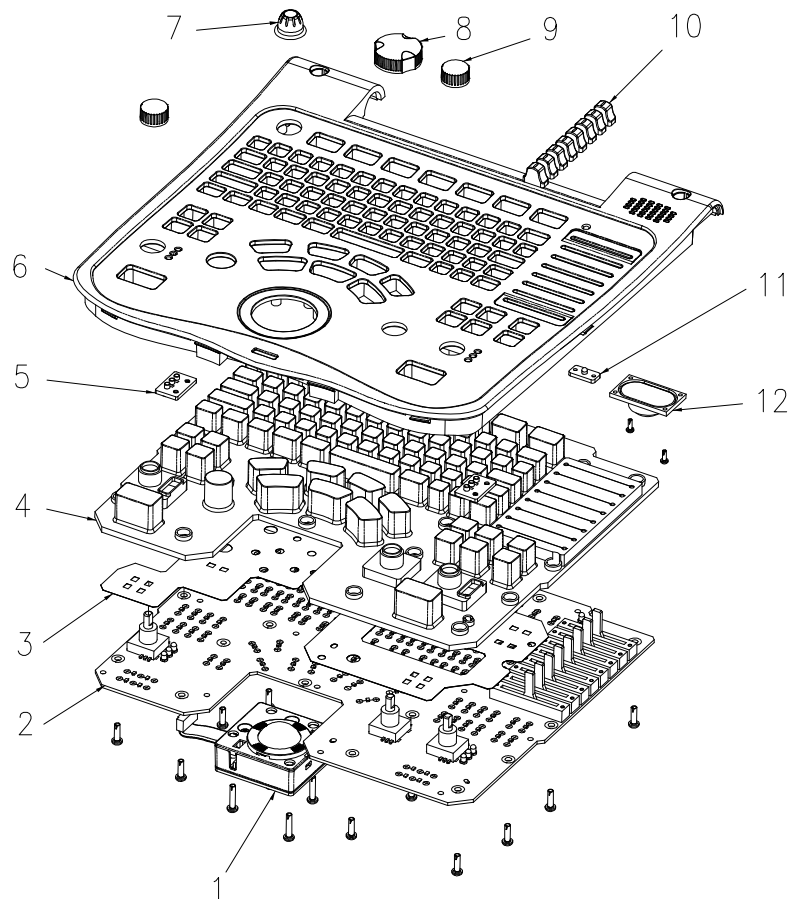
Exploded View of Top cover Keyboard Assembly
